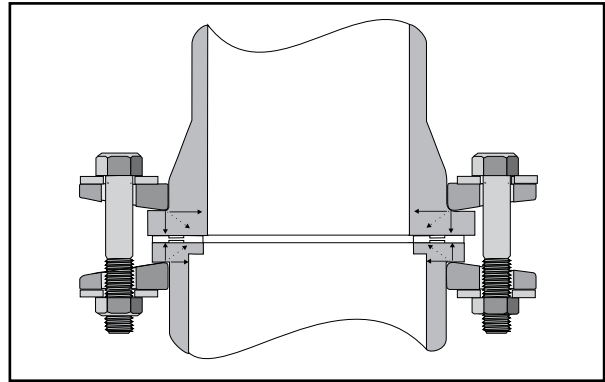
Butt-weld mated to socket fusion flange adapter; joined with conventional "flat" backing rings.
